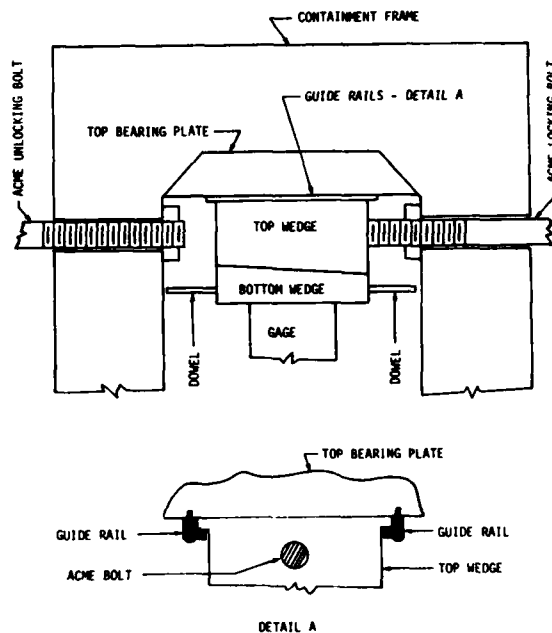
Wedge assembly, 100 ksi calibration chamber
